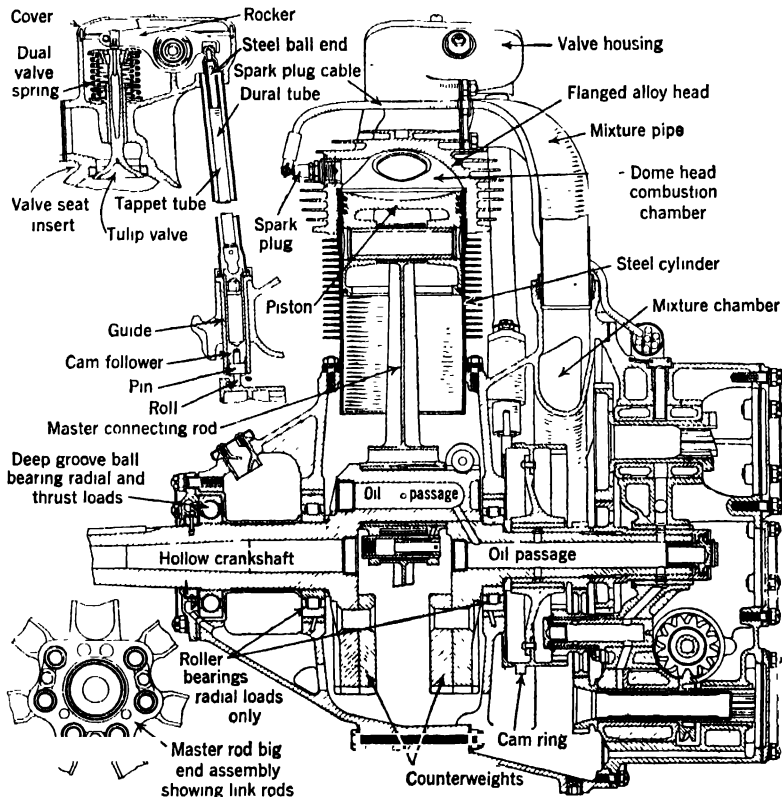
B.—Sectional View of Continental Seven-Cylinder Airplane Engine Through the Crankshaft Axis Showing Construction and Arrangement of Parts.
